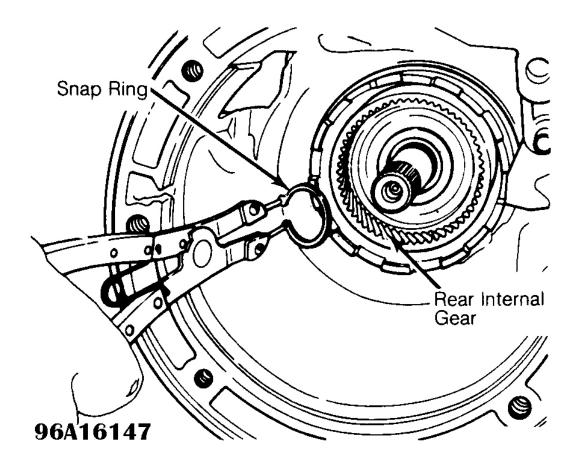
Rear Internal Gear Snap Ring Location Courtesy of FORD MOTOR CO.
